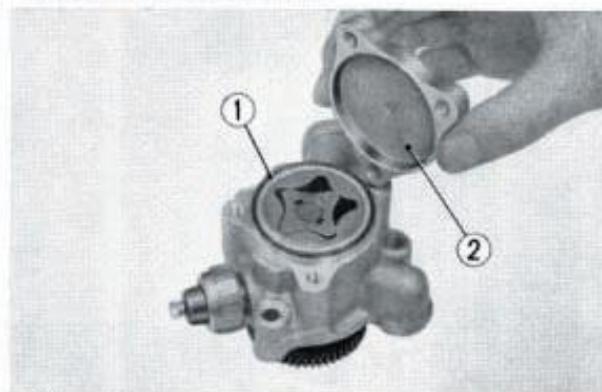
① 47 mm O-ring ② Oil pump cover
